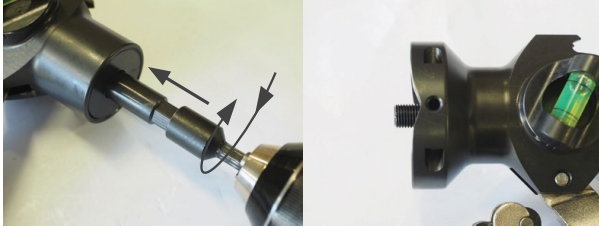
Use your drill to fully extend the cutter end (above right) BEFORE cutter installation.
